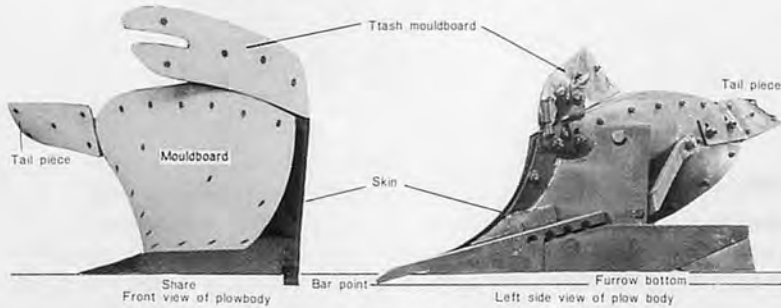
Plate II Bottom Plow with Plastic Moldboard for Wheel Tractor
